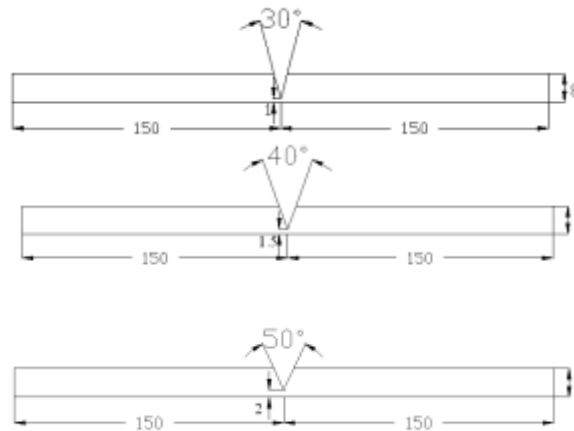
Welding geometry with groove angle 30⁰, 40⁰, 50⁰ respectively.
